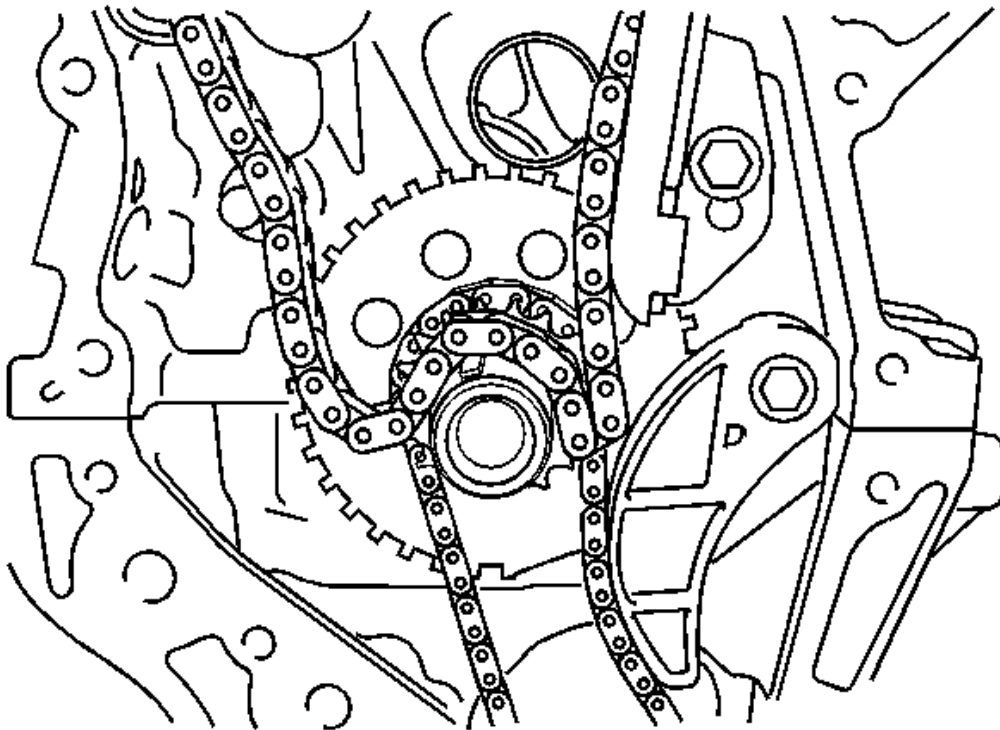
View Of Correctly Placing Chain On Crankshaft
